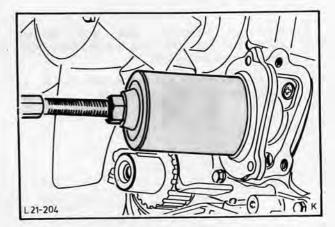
Fit auxiliary shaft front cover, using Special Tool 21–009–A
